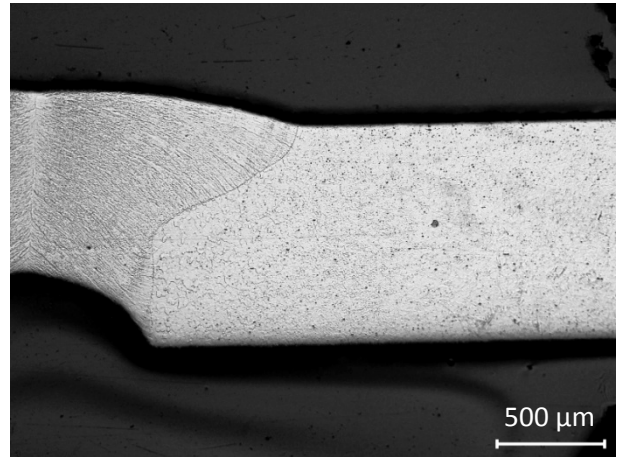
Macrograph of H-H 1.0 mm thick similar joint showing the welded zones
